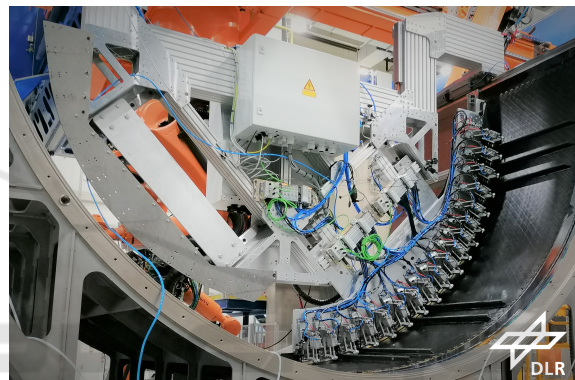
Weld bridge anchored to the placement tooling.
